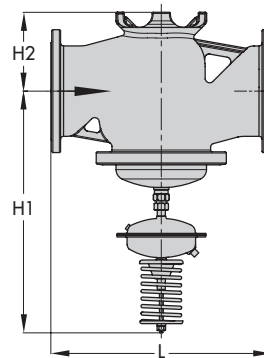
· Dimensions of the Type 2114 Valve balanced by a diaphragm and with a thermostat connection
